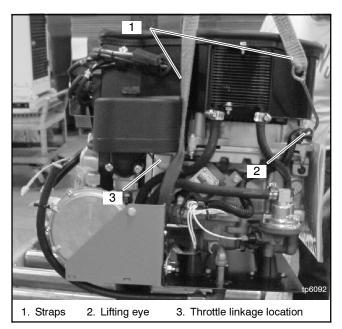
Lifting Generator Set, Air Cleaner Side
